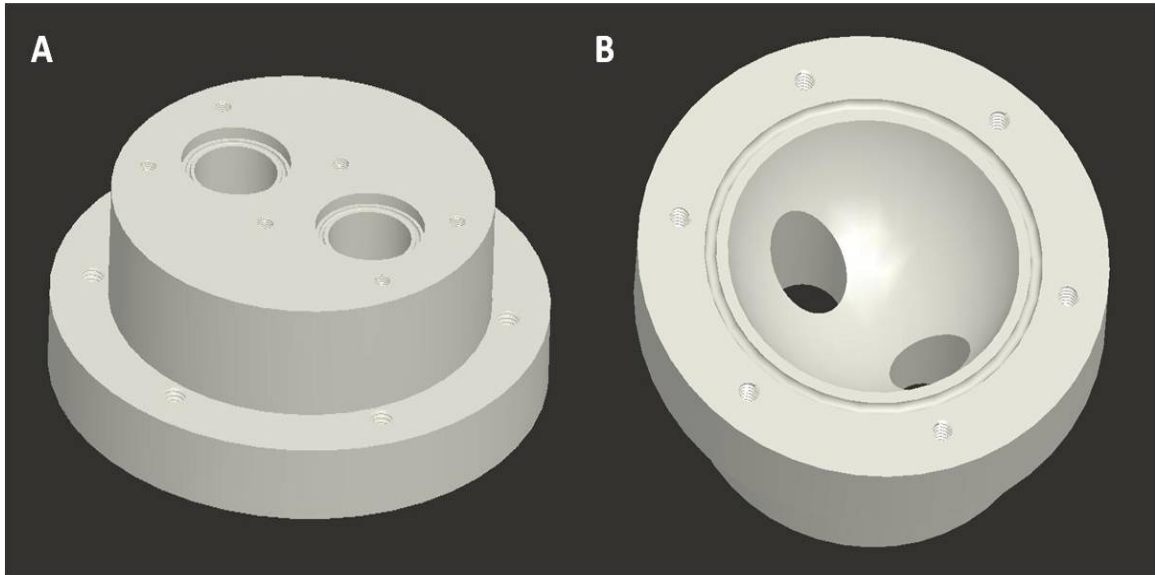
3D CAD model of the testing fluid chamber. (A) The top surface of the testing fluid chamber. (B) The bottom surface of the testing fluid chamber.
